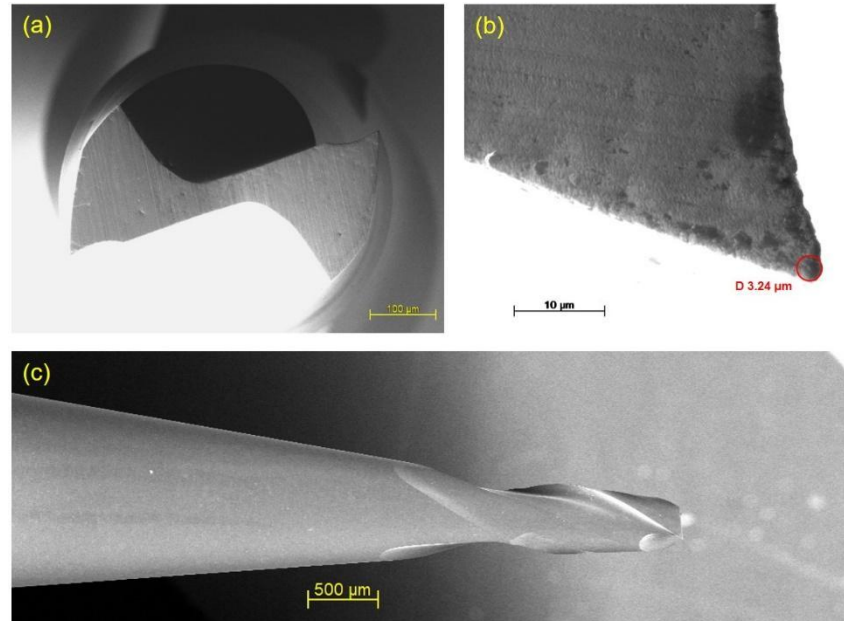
SEM images of micro-end milling cutter (a) bottom view of the tool, (b) magnified view of the cutting edge indicating an edge radius of 1.62 μm , and (c) side view of the tool indicating helical cutting edge
